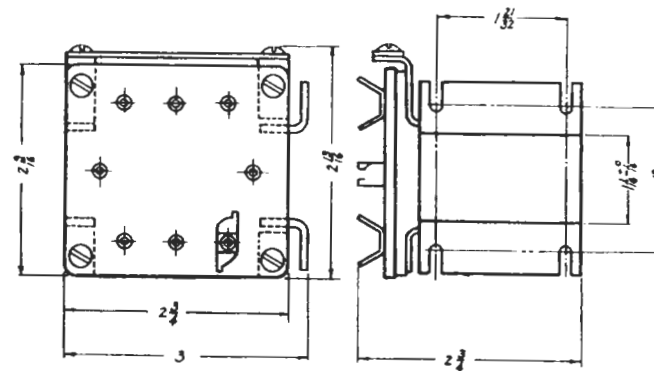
Resistors Dimensional Drawing (Dwg. M-7408005)
